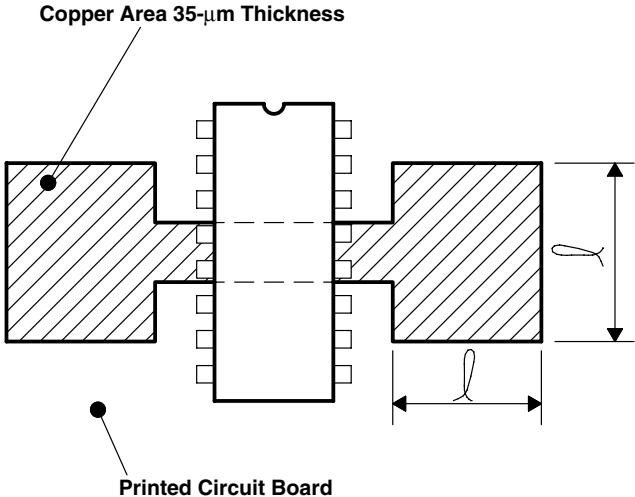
Example of Printed Circuit Board Copper Area (used as heat sink)
